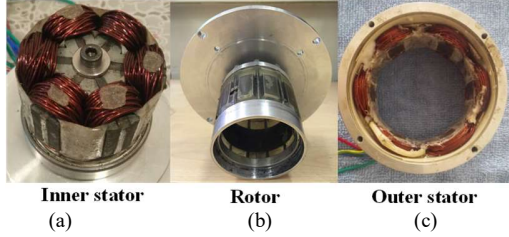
The DS-BPMM prototype. (a) Inner stator assemblies. (b) Rotor assembly. (c) Outer stator.
